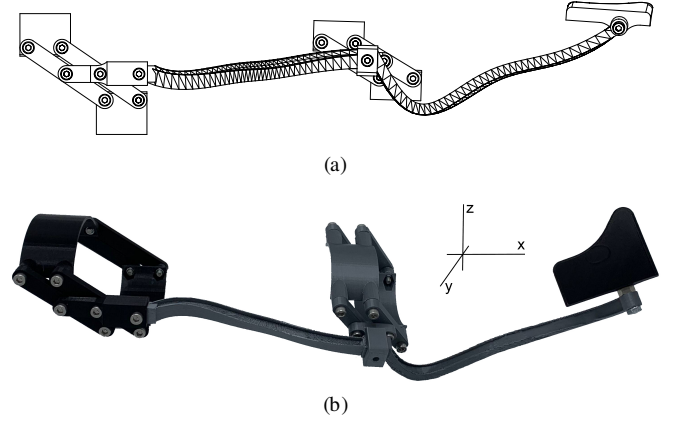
(a) Designed wrist support, (b) 3D printed prototype
